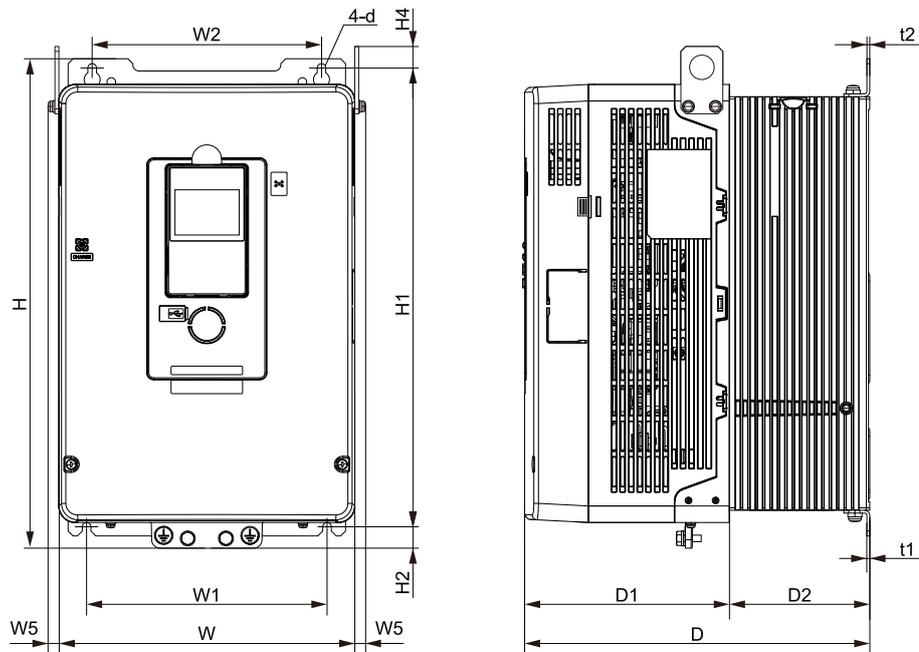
Exterior and Mounting Dimensions Diagram 4
